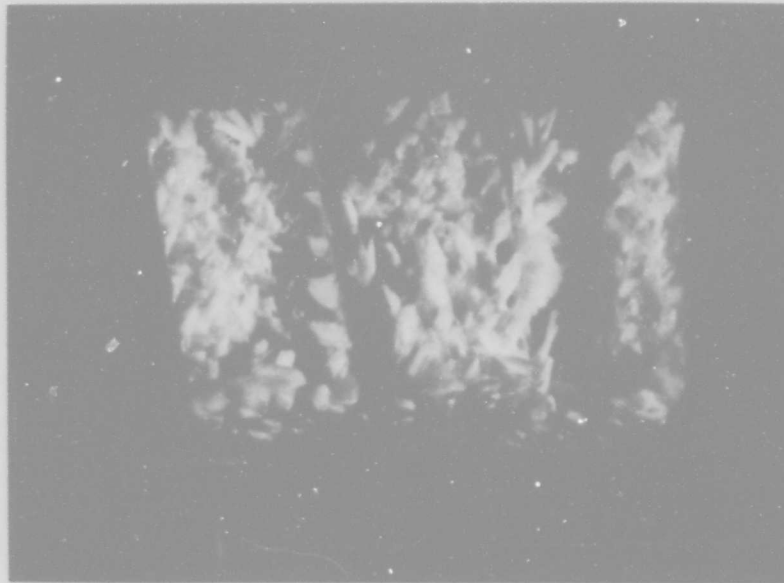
Fracture Surfaces of ASDI Tensile Specimen A-1, from ADL-4D6 Plate 404-2 (Broken Twice)
